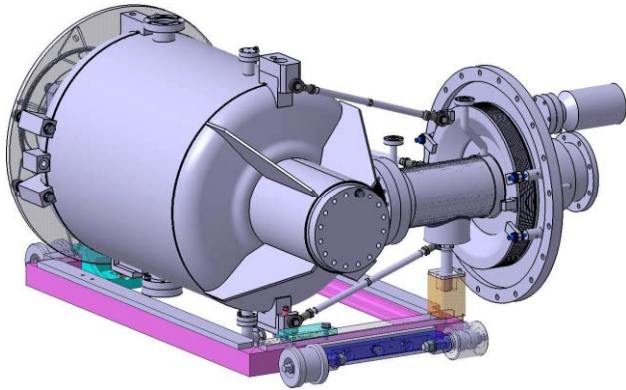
complete cavity equipped with the helium vessel and vacuum part of the FPC.
